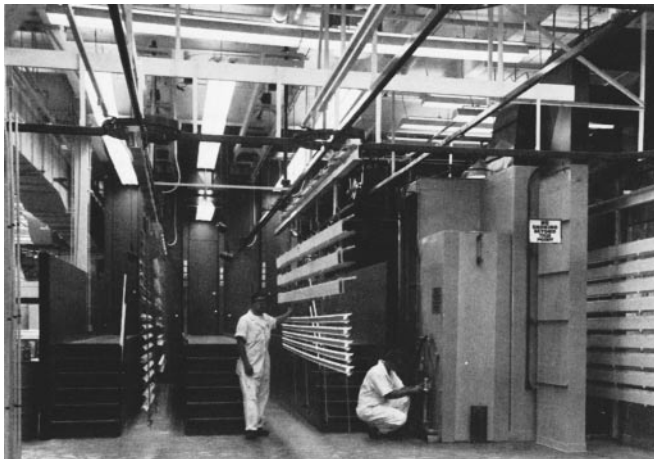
After parts have been completely inspected in dark room and monorail is lowered to down position, parts continue to white light inspection area where flawed parts are either passed or rejected. This photograph shows parts in white light station and other parts entering into liquid penetrant station.
